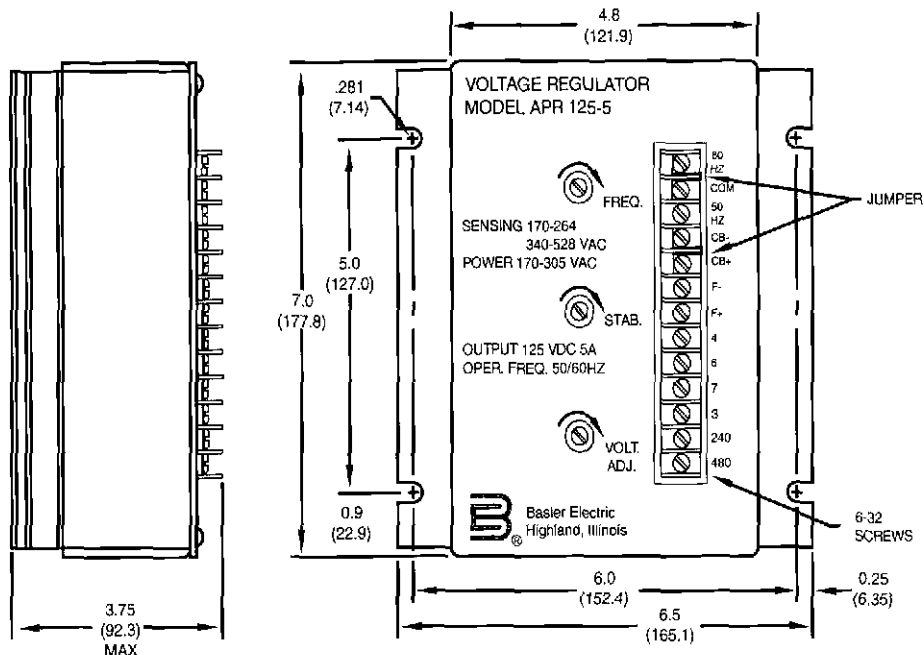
OUTLINE DRAWING, APR 125-5
